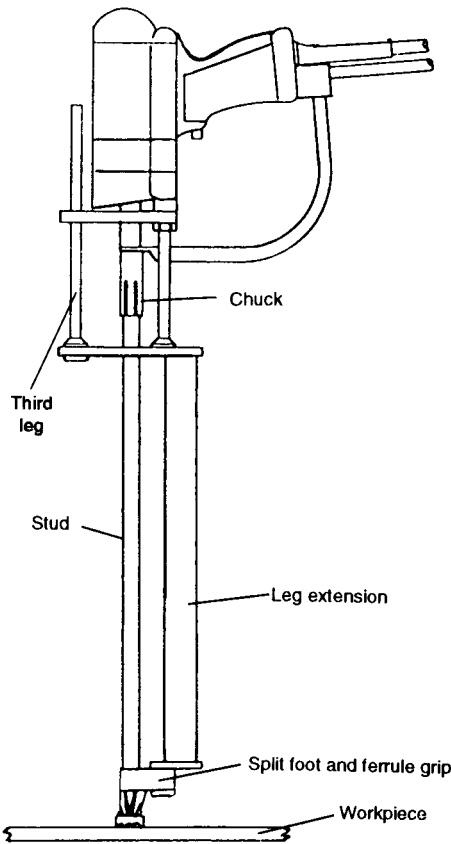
Typical leg-extension accessory for welding long studs (up to 1.83 m, or 6 ft). Note the use of a split foot and ferrule grip; the gun does not have to be stripped the full length of the stud when the stud is welded.
